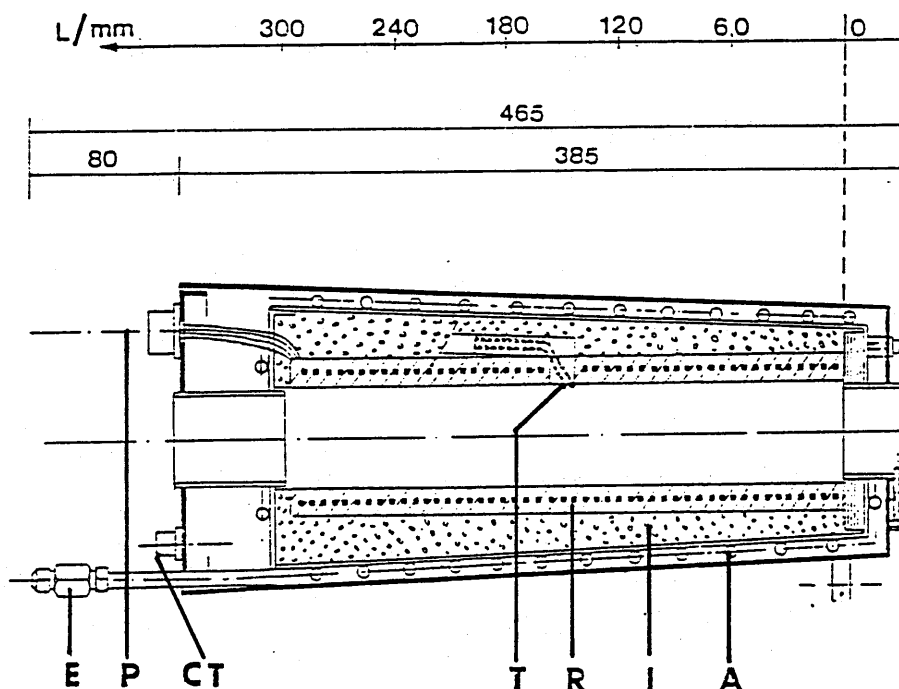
Lengthwise section view of the furnace F. Key to symbols: A – cooling water jacket, CT – thermocouple connections (output), E – cooling water inlet and outlet, I – insulating layer, P – power input from mains, R – heating coils, T – thermocouples.
